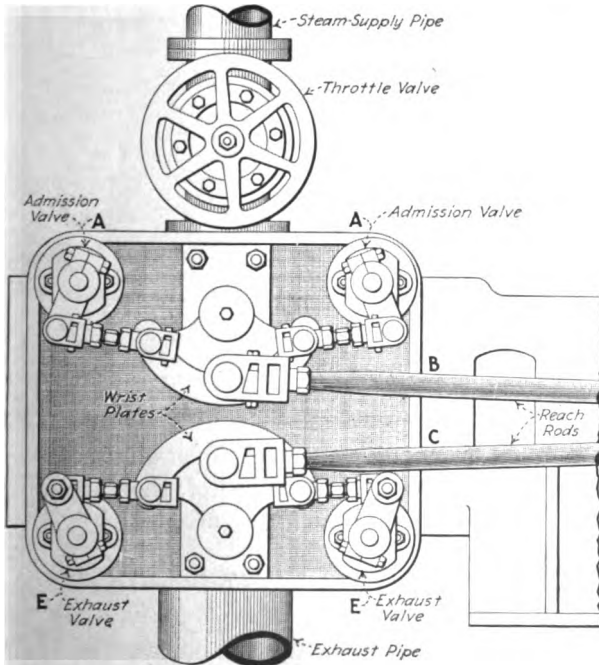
Chuse positively-operated Corliss-valve mechanism
